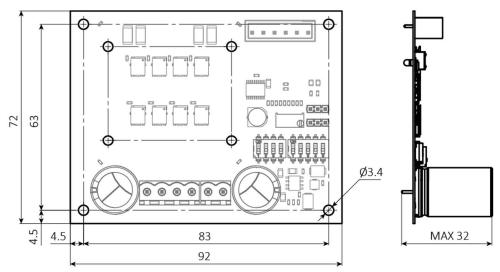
Dimensions of stepper motor driver SMD-4.2 open frame version
